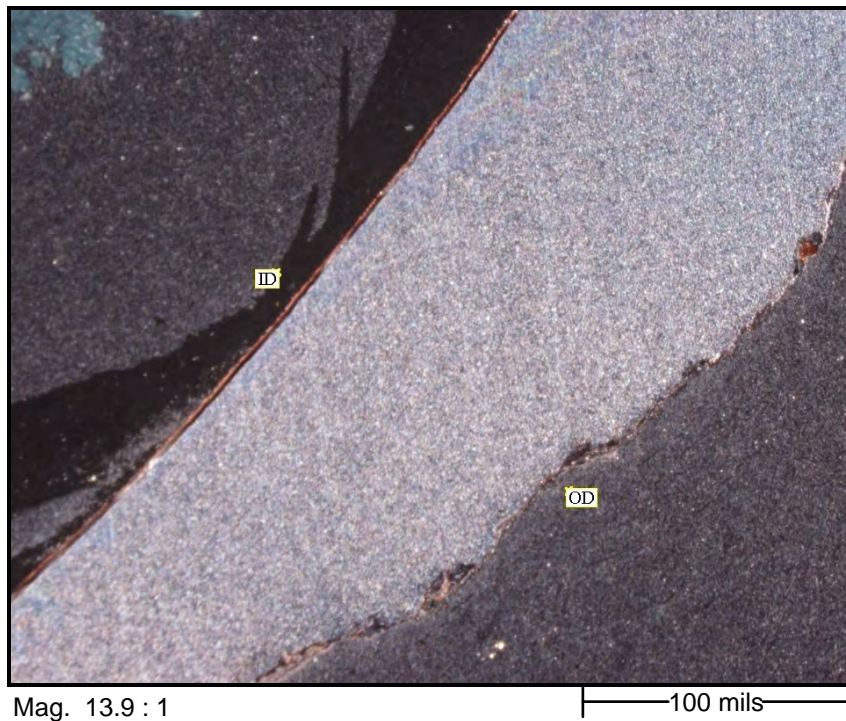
4 o'clock: An overall view of the mounted cross-section. Note general corrosion on the OD. On the ID a reddish coating layer is present; no corrosion on the ID.
